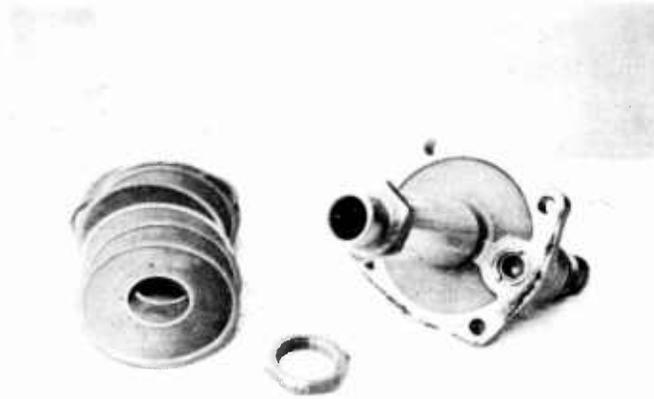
Transmission Oil Filter With Blocking Element Installed.
